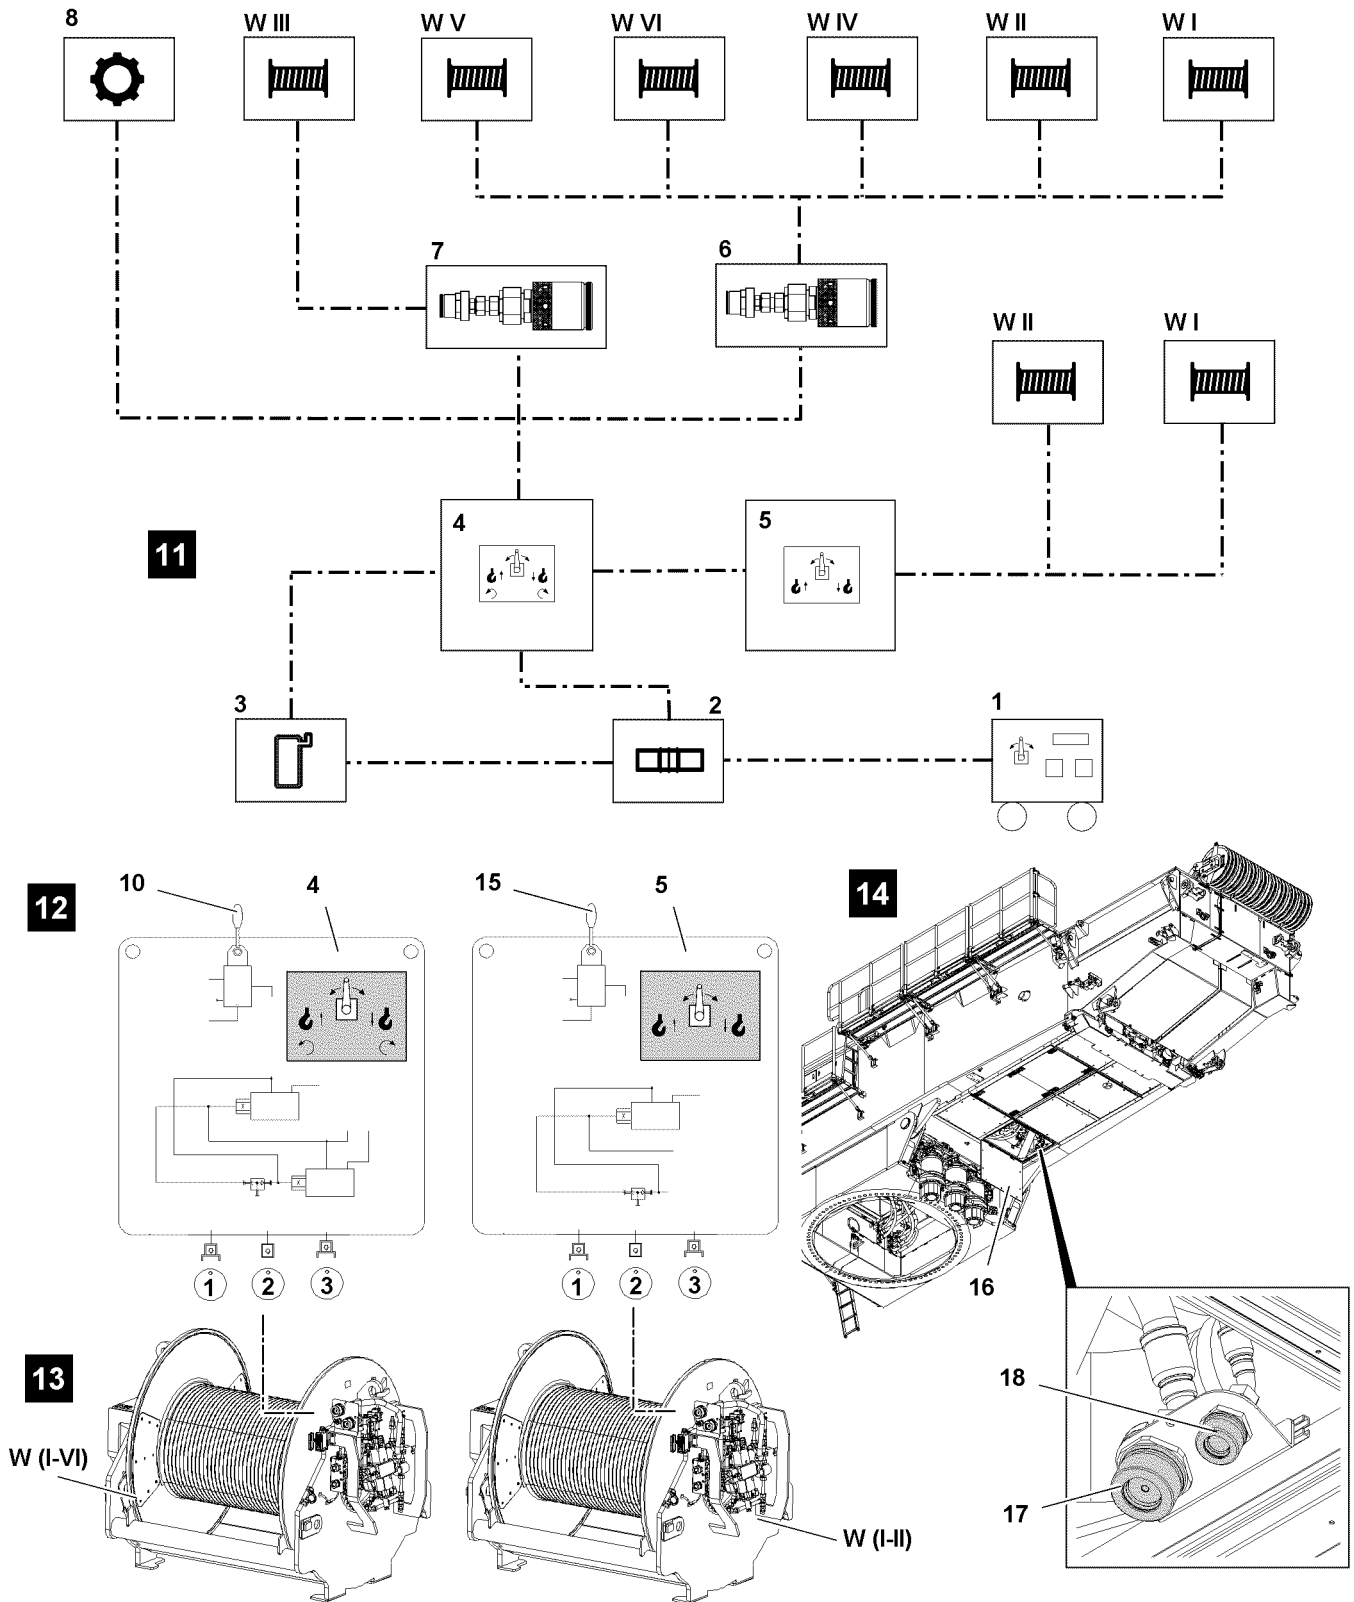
Emergency control with assembly plate(s) Variation 2 (V2)
